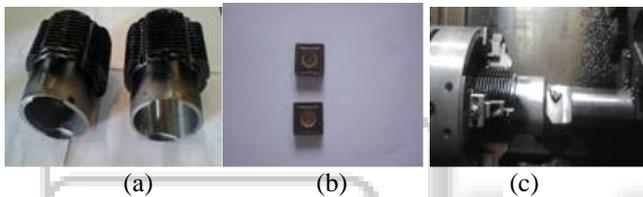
a) Carbide inserts b) Cylinder liner c) Machining process
